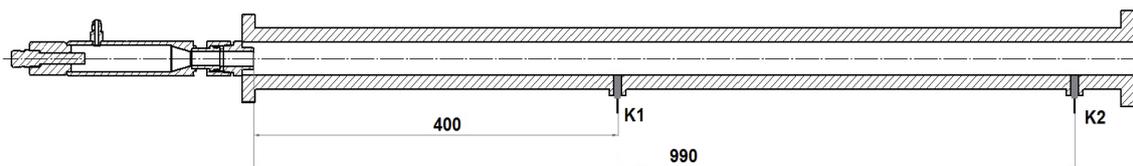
The test stand scheme with measuring sensors (K1, K2) mounted
